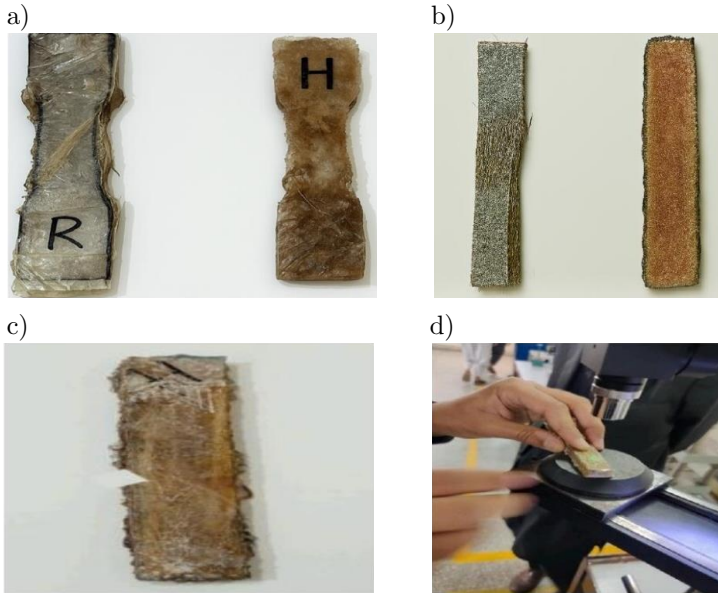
Mechanical test specimens: a) tensile specimen, b) flexural specimen, c) impact specimen, d) hardness evaluation specimen.
